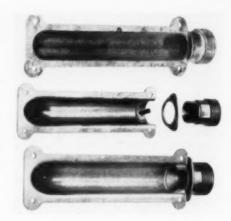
(Top) Illuminating gas meter part produced by former casting method; (center) exploded view of gas meter part produced by brazing method; (bottom) assembled view of brazed gas meter part
